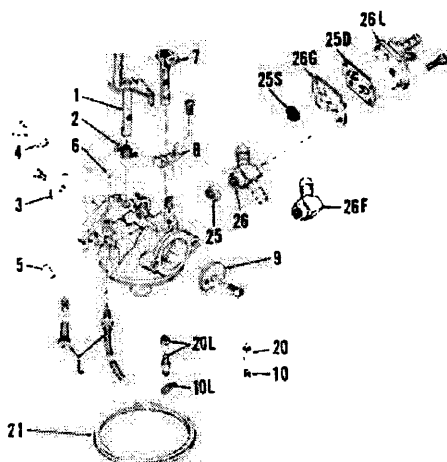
Exploded view of Tecumseh carburetor. On gravity feed models, fitting (26F) is used. On early fuel pump models, pumping element (4), outlet check valve (25), inlet check valve and fitting (26) are used. On latest models with fuel pump, check valves (25D), inlet cover (26L) and screen (25S) are used.
